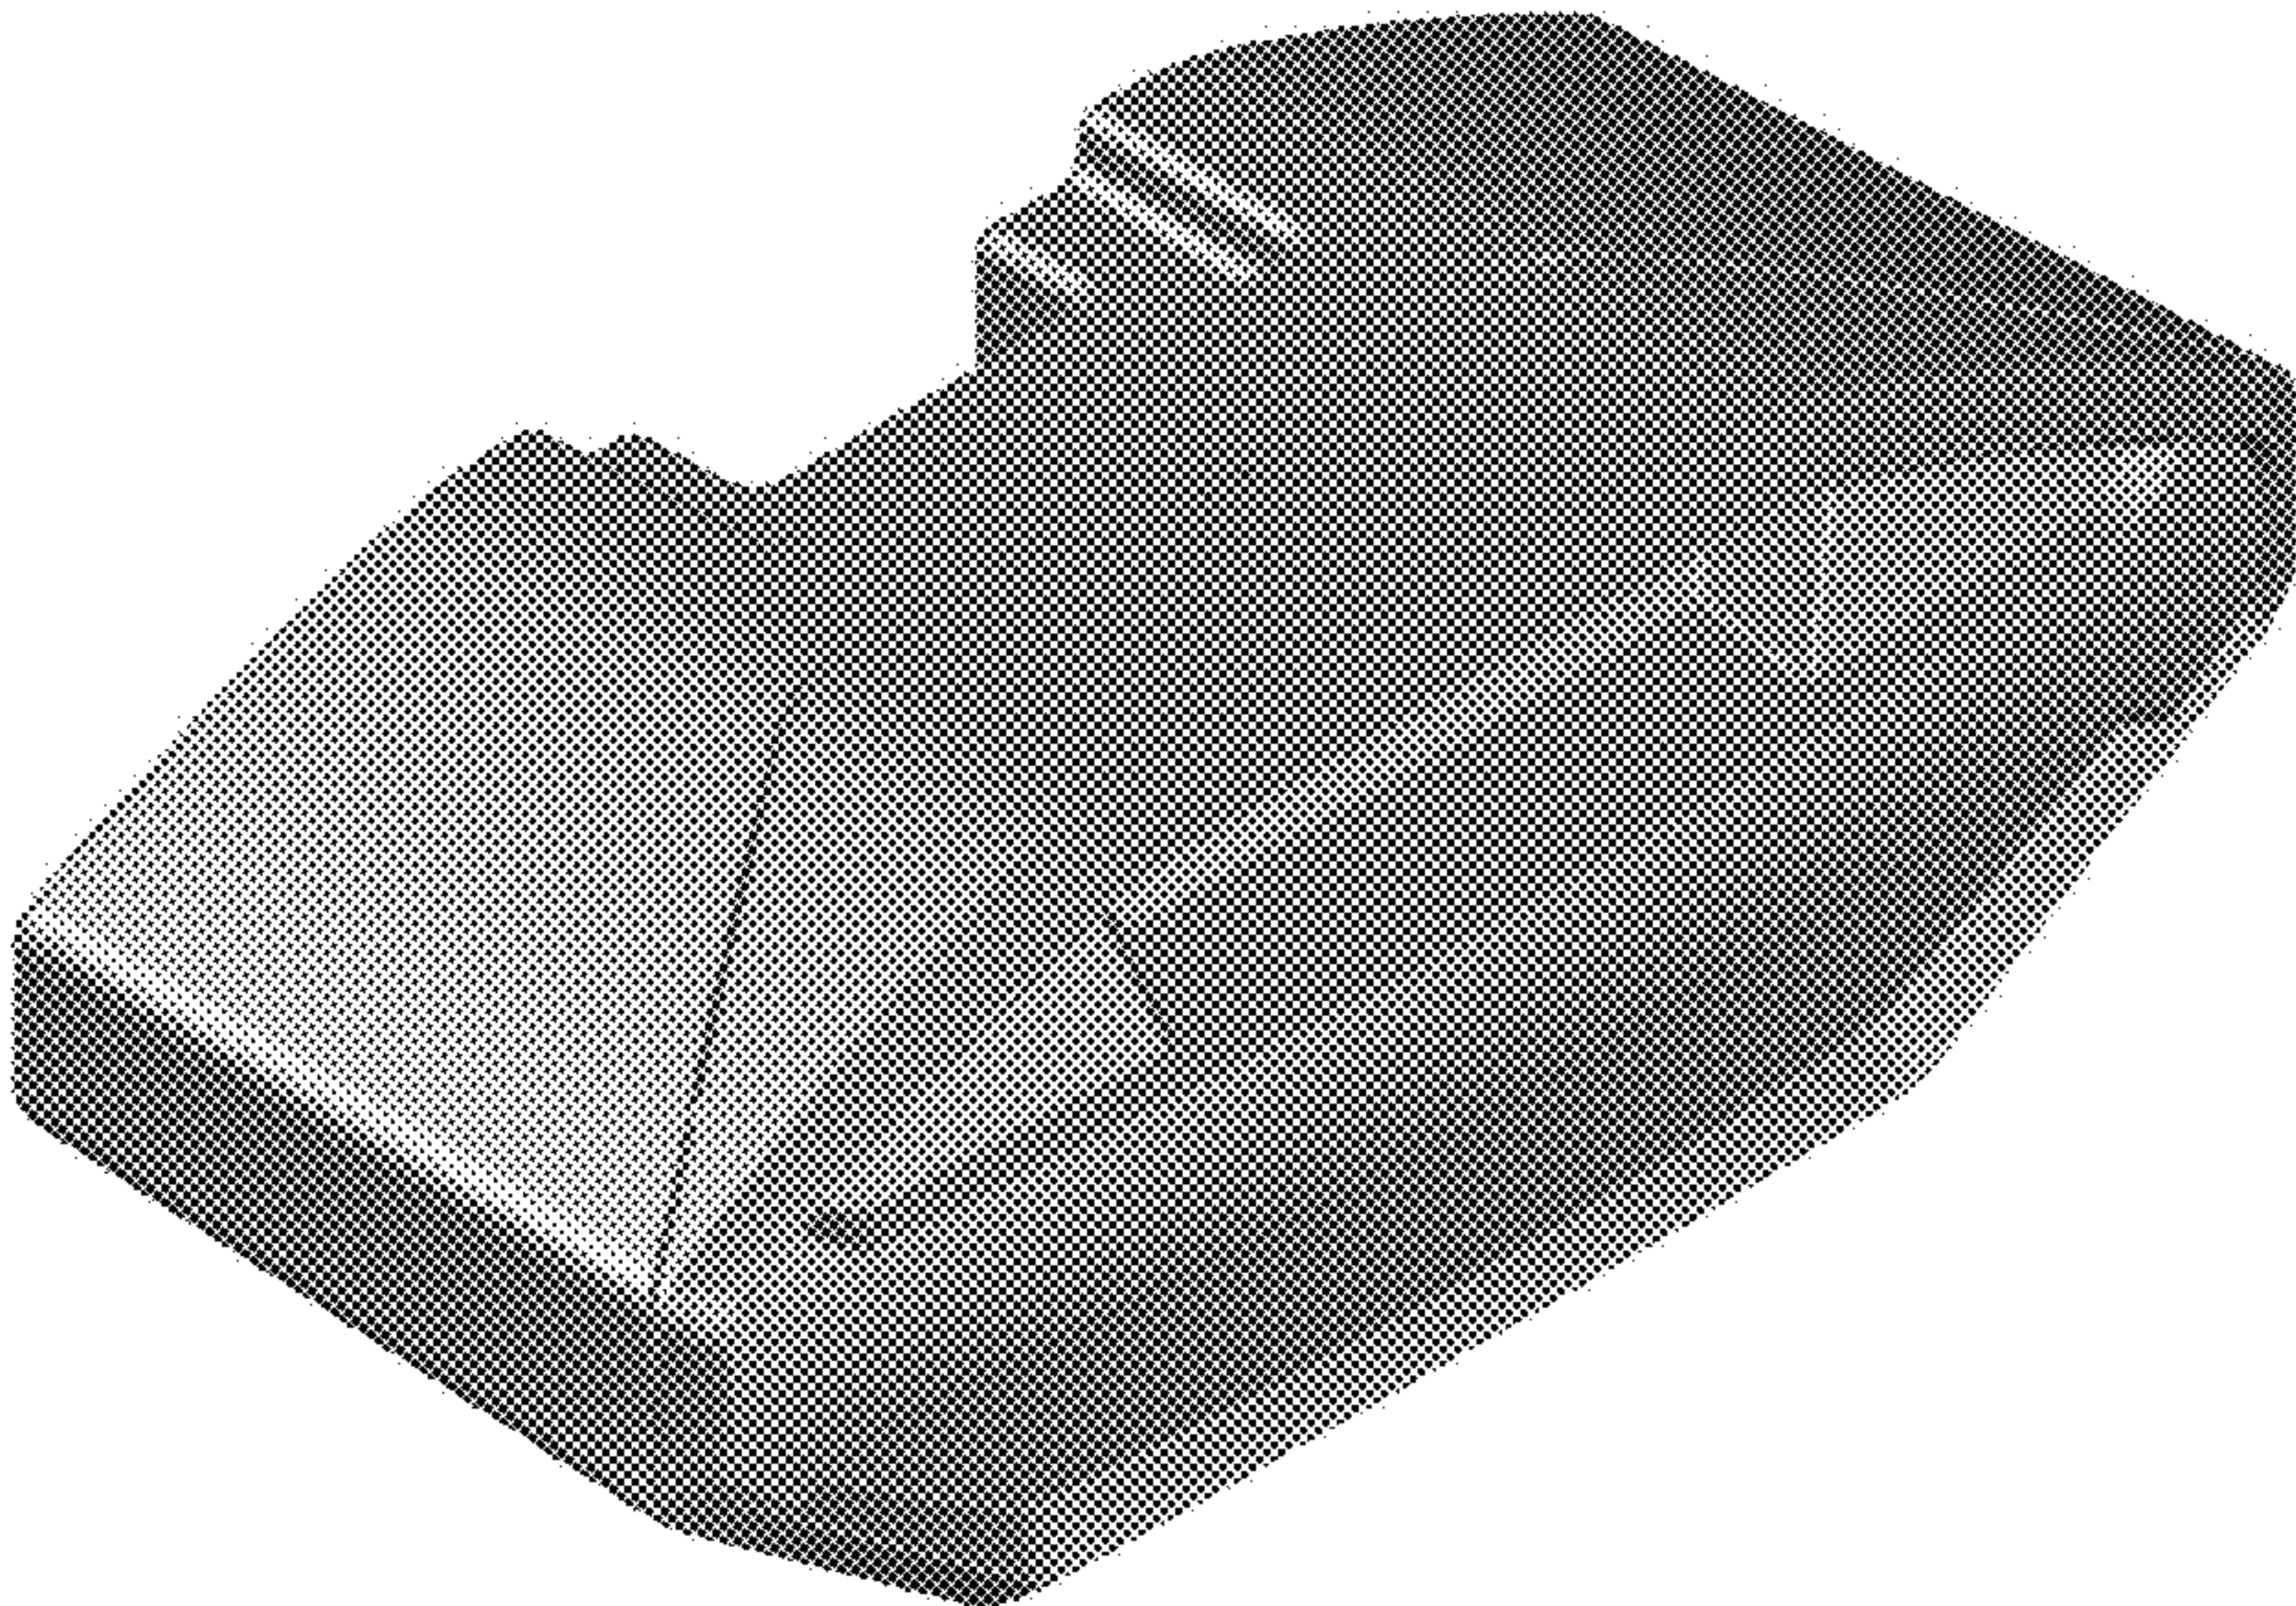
is a left side view of a cargo box for portable robot of FIG. 1.
